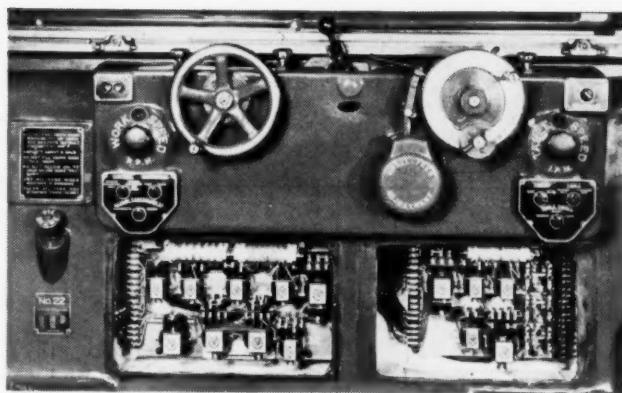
SETUP SWITCHES ON A PLAIN GRINDING MACHINE
